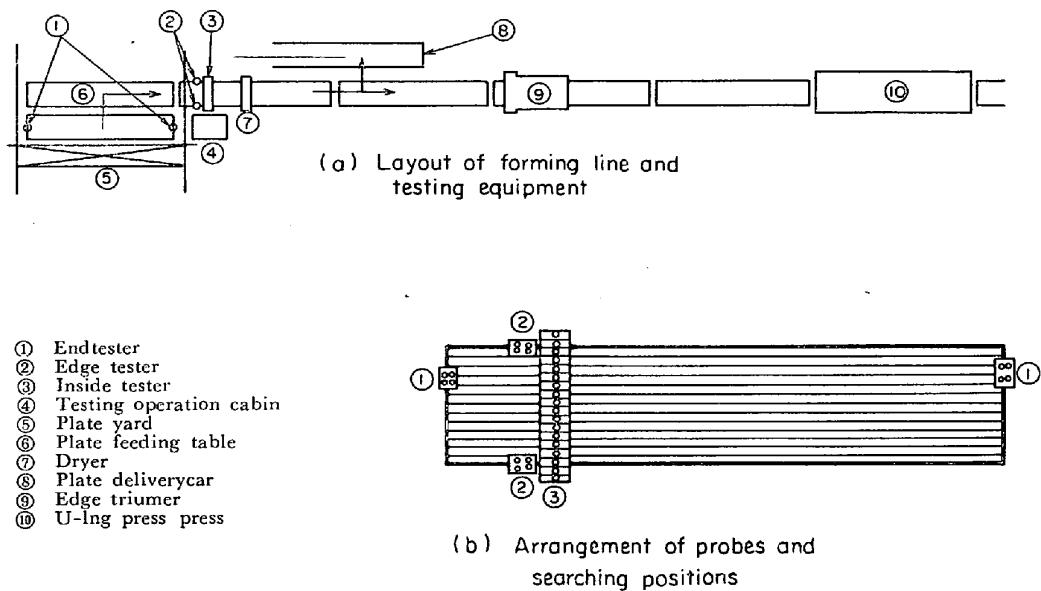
Arrangement of automatic ultrasonic testing equipment.
